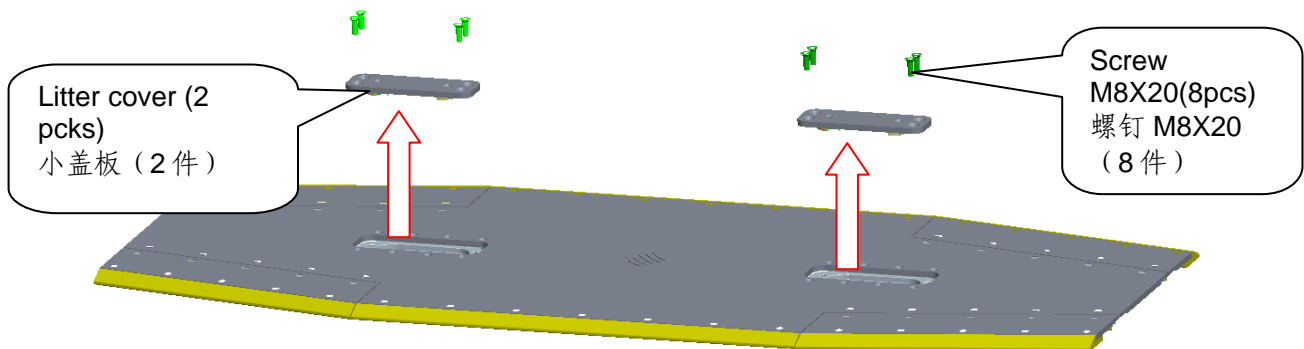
Remove bridge plate assy.; disassembly as per figure instruction
